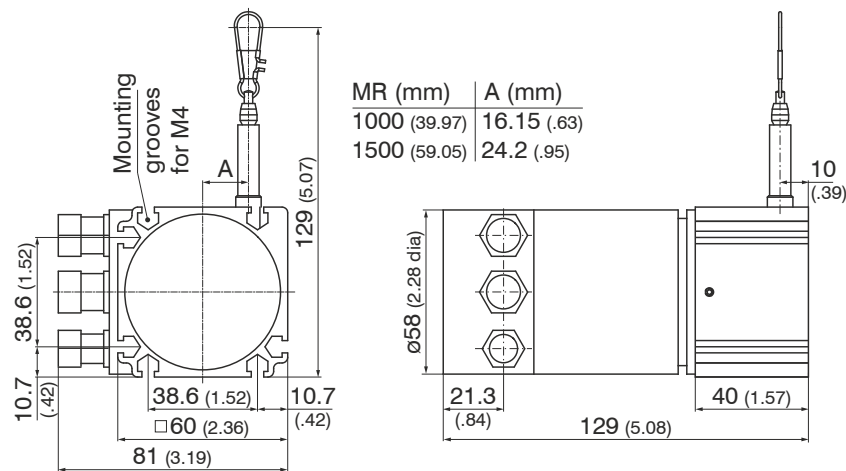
Dimensional drawing ... - FD60 - CAN/PB, dimensions in mm (inches), not to scale
